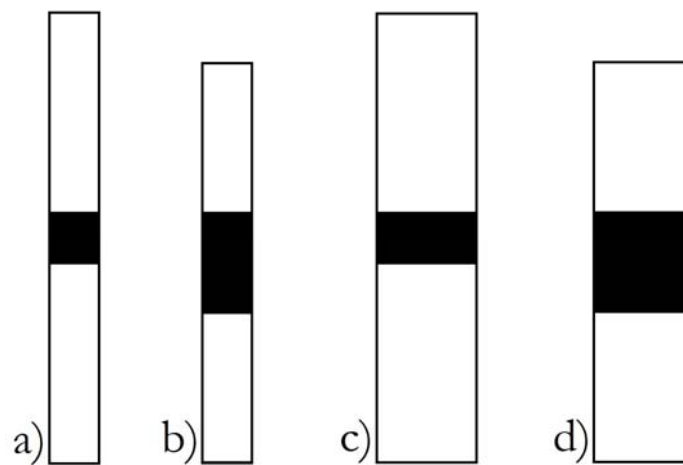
Schematic figure of each overlap area between pairs of adhering sheets a) 10 mm×10 mm narrower b) 10 mm×20 mm narrower c) 20 mm×10 mm broader d) 20 mm×20 mm broader.
